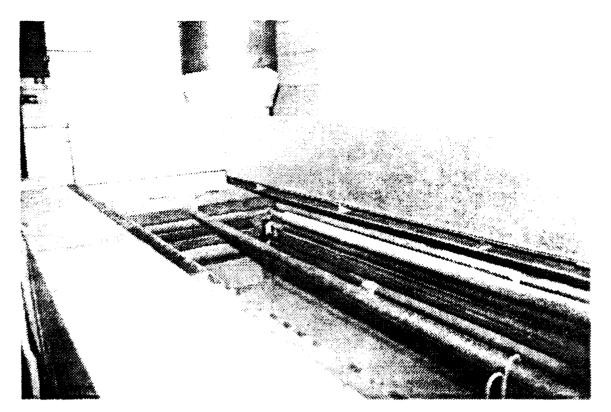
Closeup of secondary chiller coils inside degreaser.
